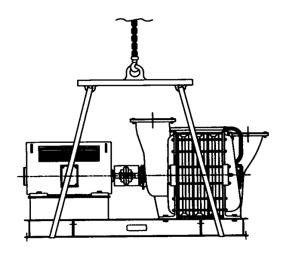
Fastening the lifting gear to the steel base of the machine group
